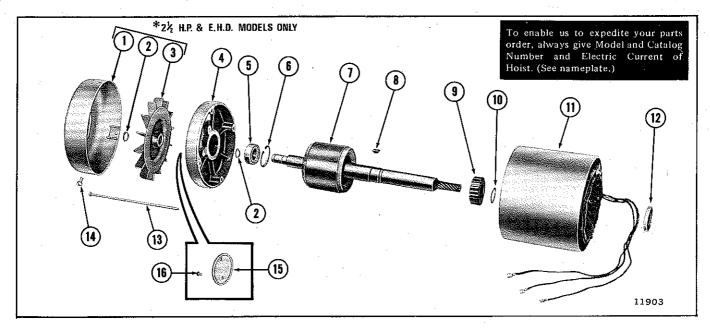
THREE PHASE MOTOR ASSEMBLY - SINGLE SPEED
